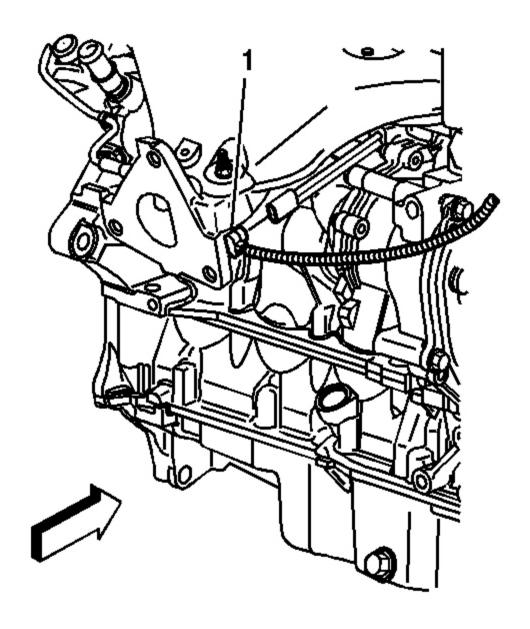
Coolant Heater View Courtesy of GENERAL MOTORS CORP.
